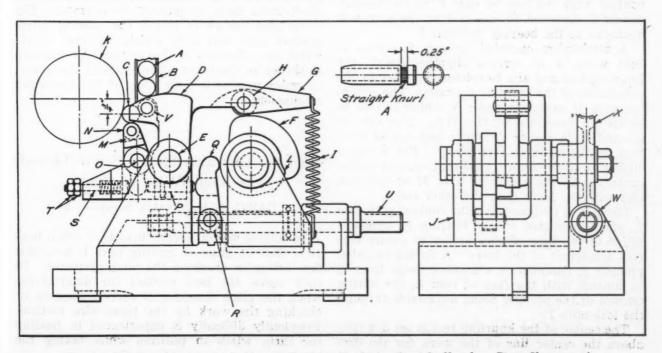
Fixture with Automatic Hopper Feed for Producing Straight Knurl on Piece Shown at A
